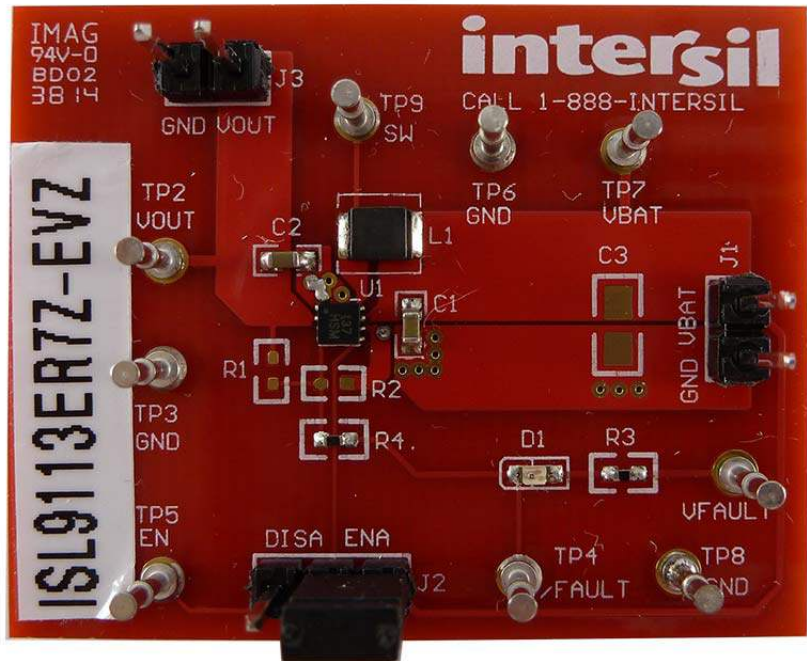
ISL9113ER7Z-EVZ BOARD TOP VIEW
